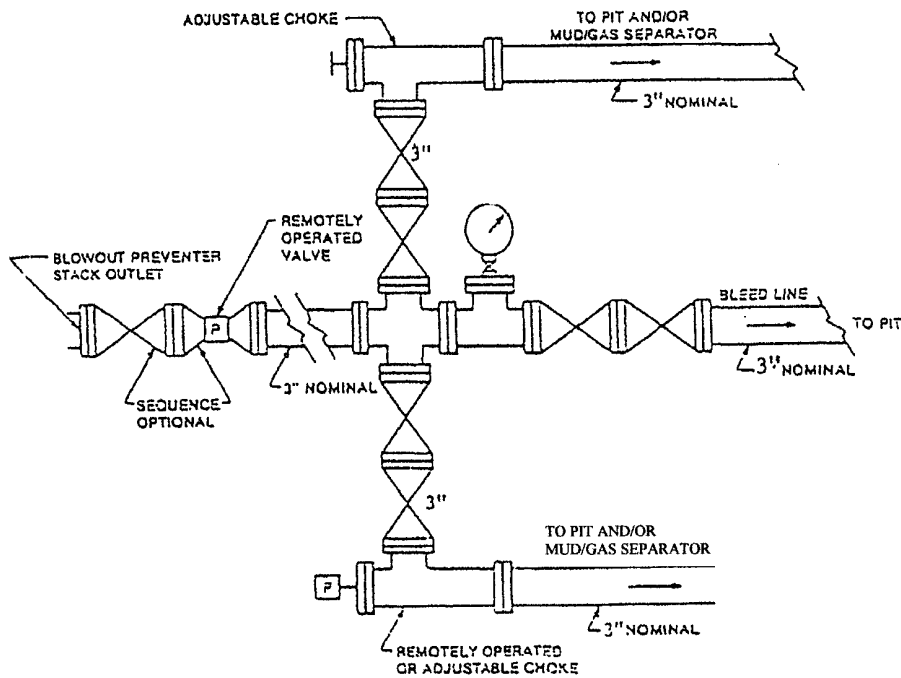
Typical choke manifold assembly for 5M rated working pressure service - surface installation.
